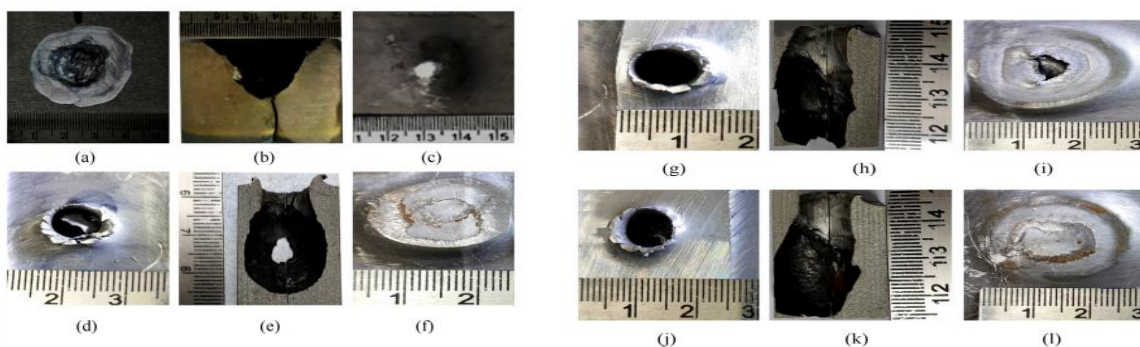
Front, cross-sectioned and rear views with lead core projectile: (a)-(c) BM (d)-(f) Weld Nugget; (g)-(i)-TMZ; (j)-(l) HAZ
